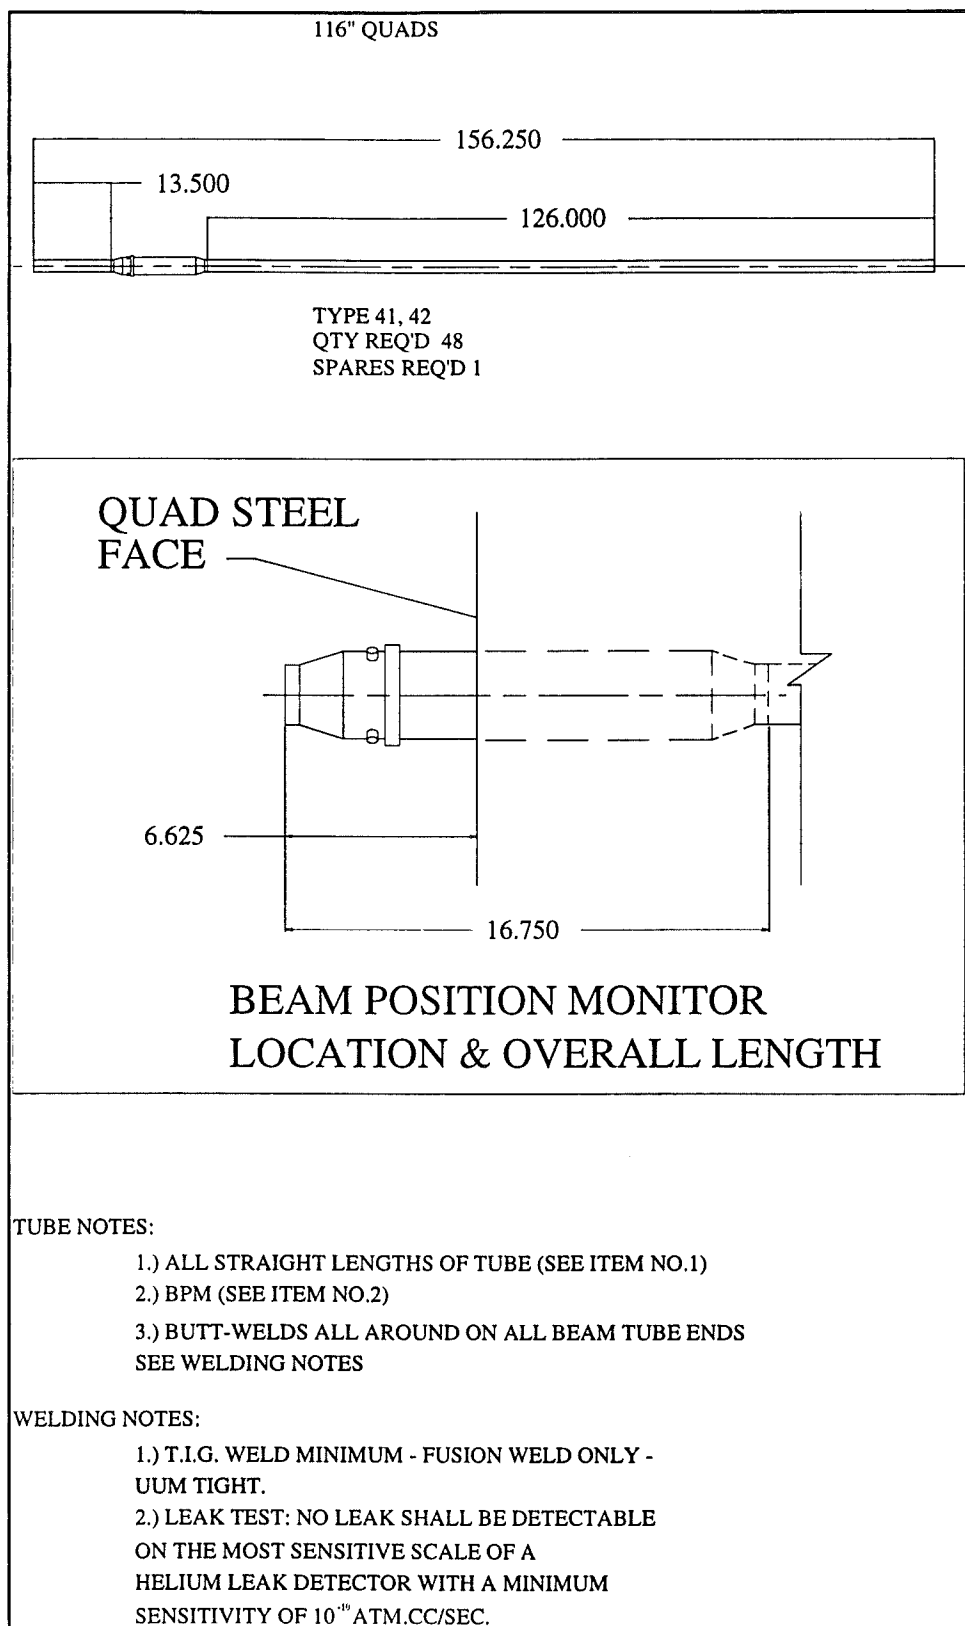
Quadrupole Beam Pipe Assembly (cont.).
